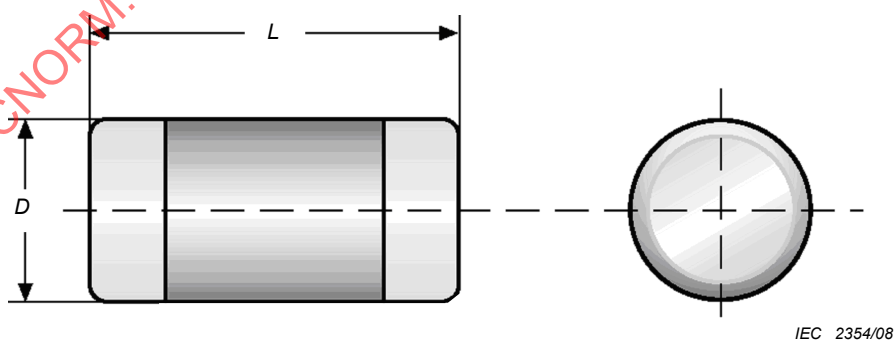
Shape and dimensions of cylindrical (RC) resistors
